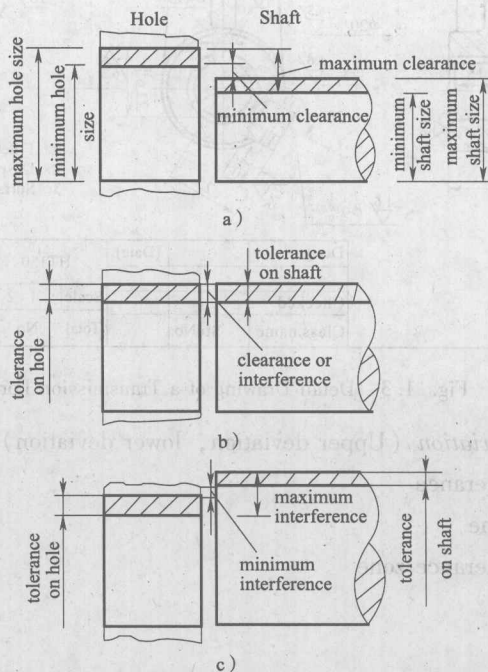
Conditions of Fit Between a Hole and a Shaft
